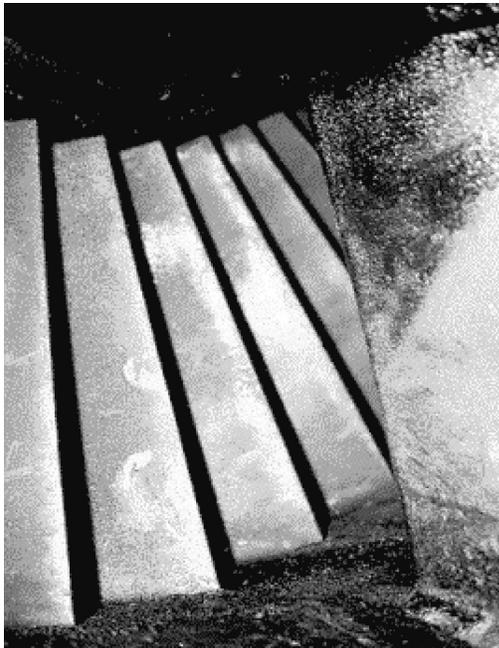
Severe Oily Deposits on Compressor Blading, Caused Mainly by Oil Leaks in the Bearing System.
